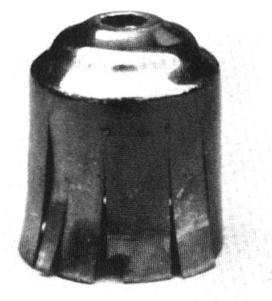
Stresscorrosion cracking in a deepdrawn brass part for a light fixture. The cracks developed over a period of time. Brass and austenitic (300 series) stainless steels are among metals that are susceptible to stresscorrosion cracking.
